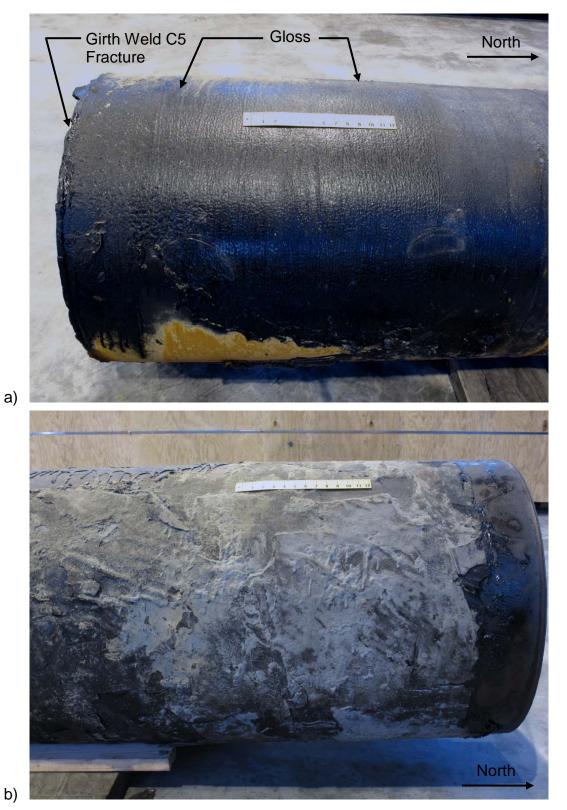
Condition of the asphalt coating on the northern section; a) Top of pup 5 adjacent to the girth weld fracture; b) Away from the fracture close to the cut end.
